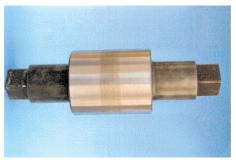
Cold rolling tool for wire production, wear and tear area severally coated (5 mm thickness) with WC/Co-NiCrBSi by multi layer stacking
